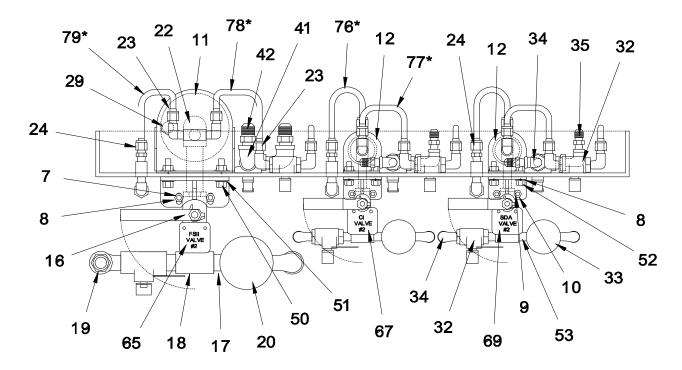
Control Panel Sub-Assembly (Sheet 2 of 3).
